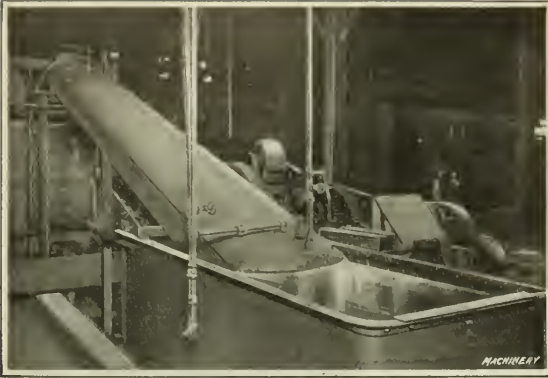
Delivery End of Gas Medium Furnace—note Arrangement of Water Seal
